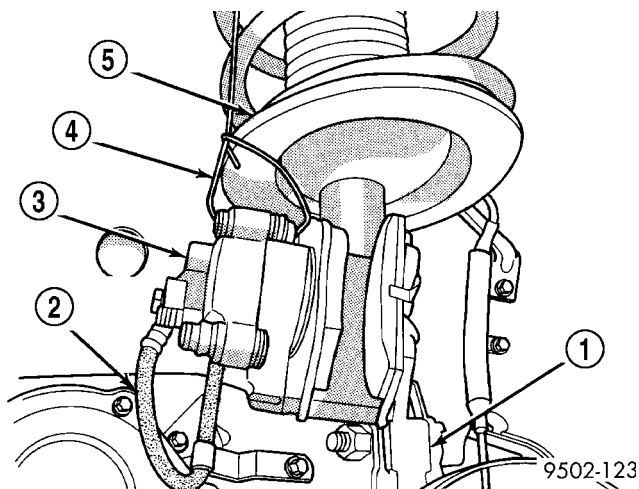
Properly Supported Disc Brake Caliper - Typical
